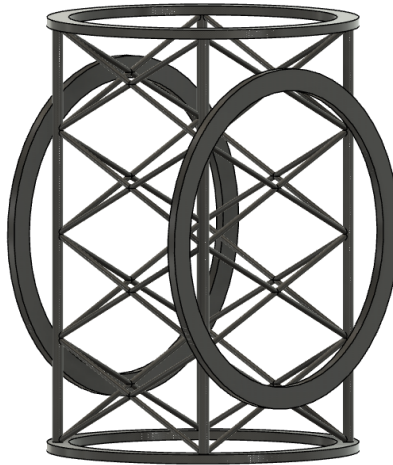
Detailed view of the joint section to connect four sections in the Modular IsoTruss design.
